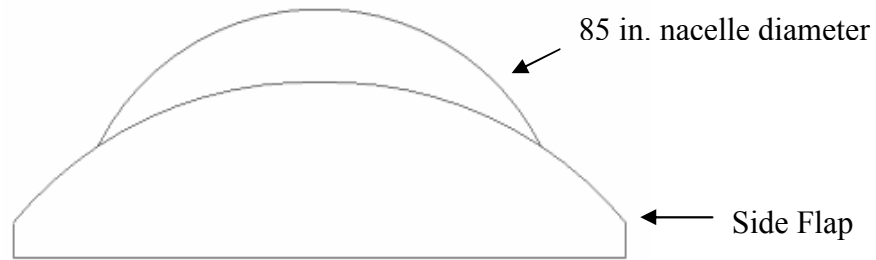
Rear View of Hermes' 3.5 Aspect Ratio D-nozzle
